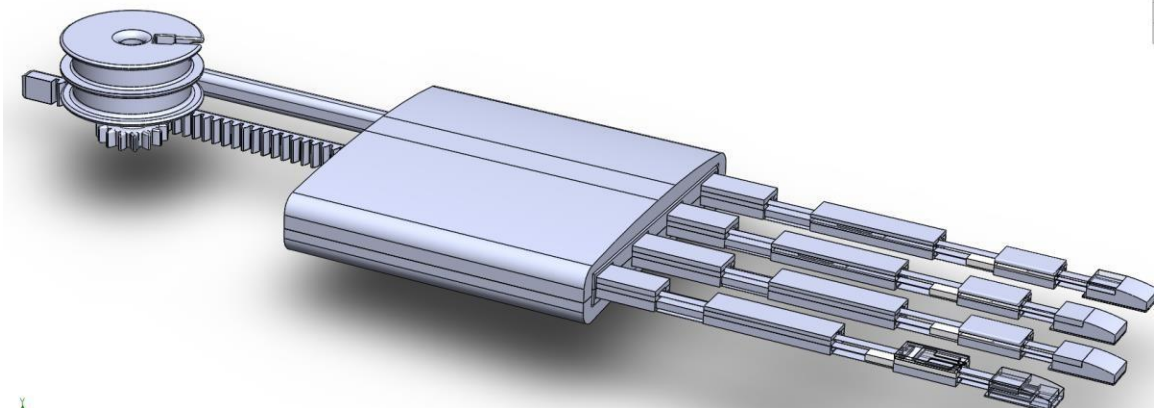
Final CAD Model: Mechanism with hand casing. (The finger casing slides into it).
